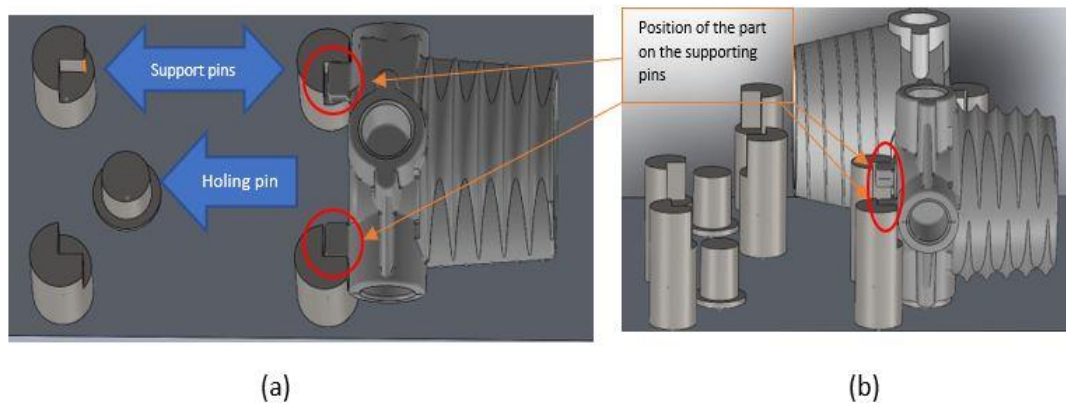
(a) Top view of the part resting on the holding pin and support pin (b) Front view of the part resting on the pins in 3D CAD assembly.
